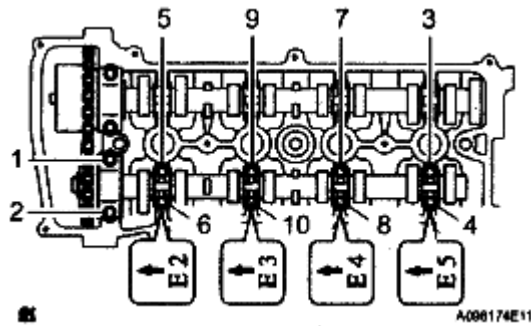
Identifying Bearing Caps Bolts In Sequence
